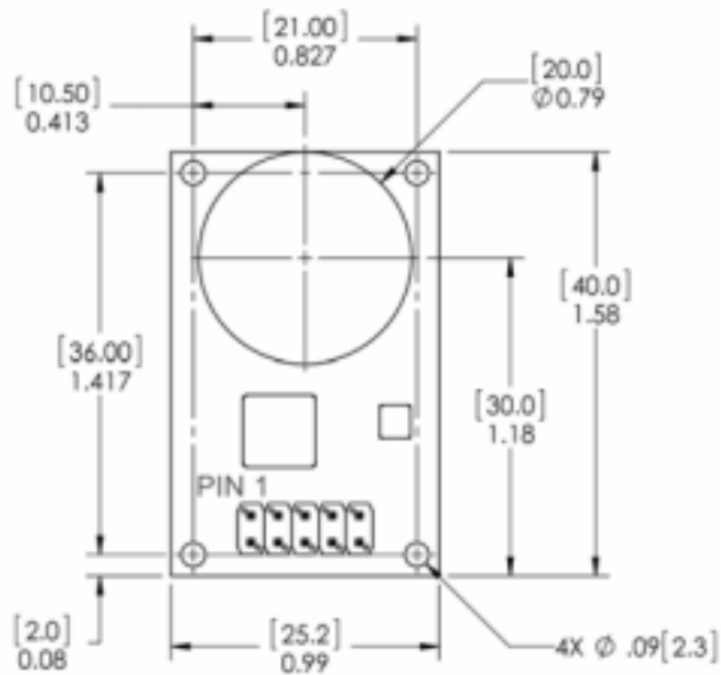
SprintIR carbon dioxide sensor dimensions [14]
